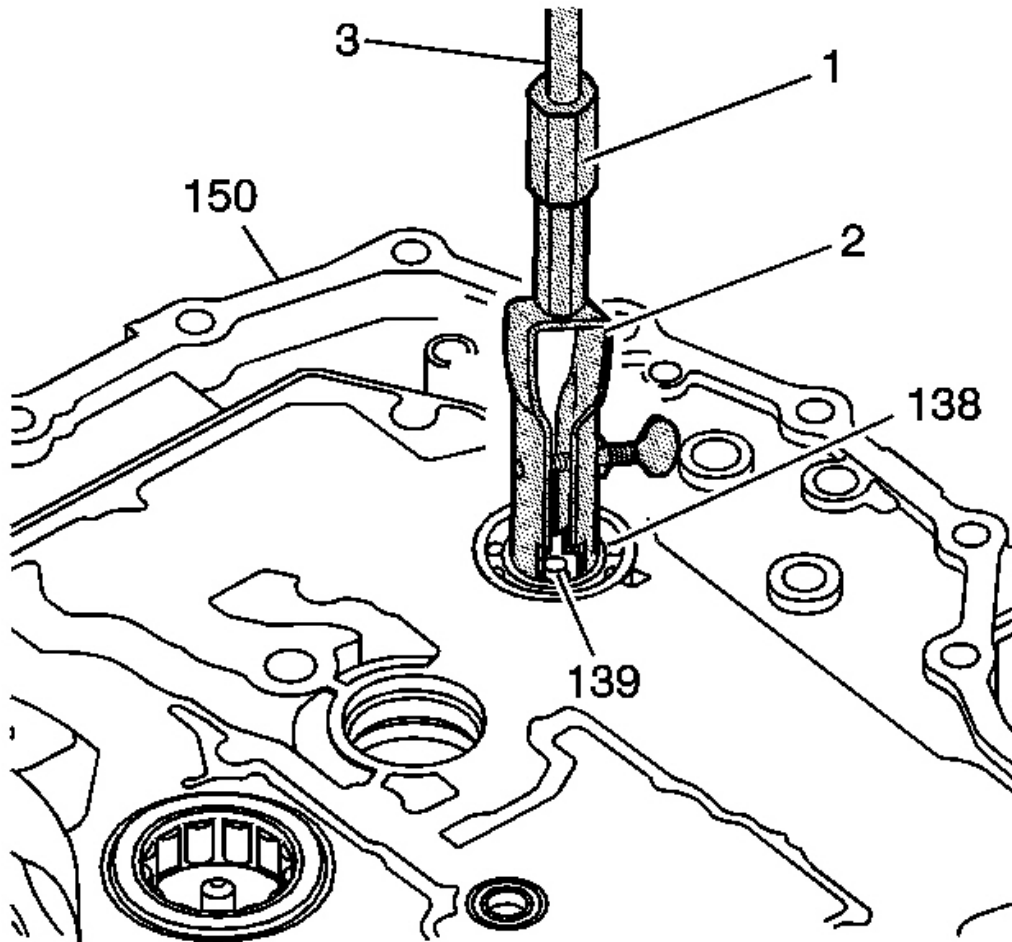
J 26941, SA9133T, SA9133T-1 & 3rd Clutch Shaft Front Bearing
